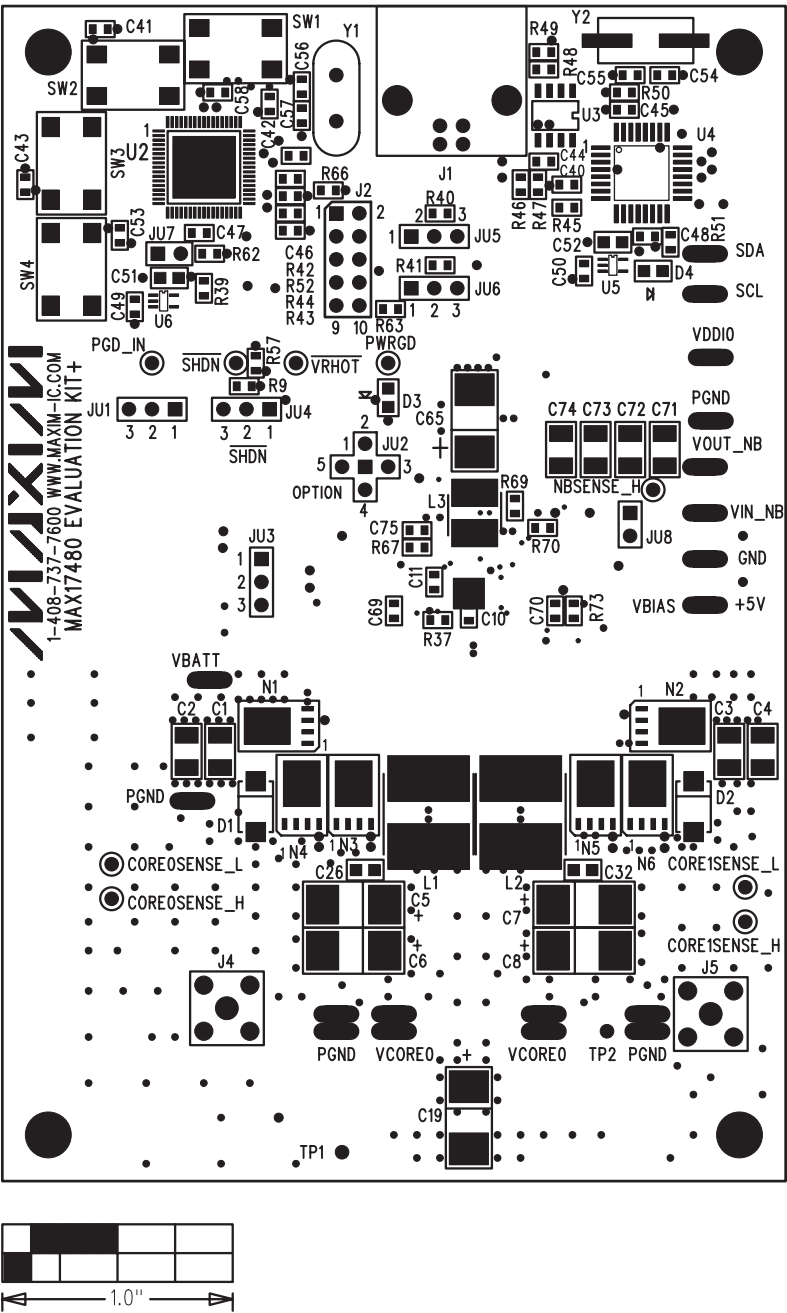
MAX17480 EV Kit Component Placement Guide—Component Side
